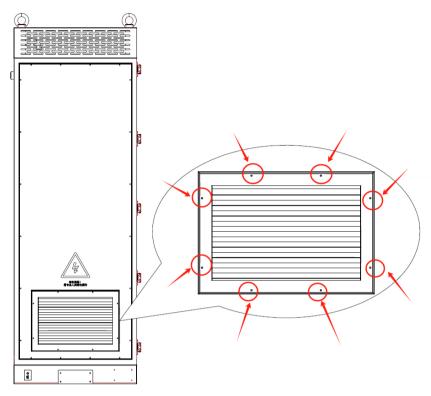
Position of cabinet sealing board (KYT25kW-60kWh-A for example)
